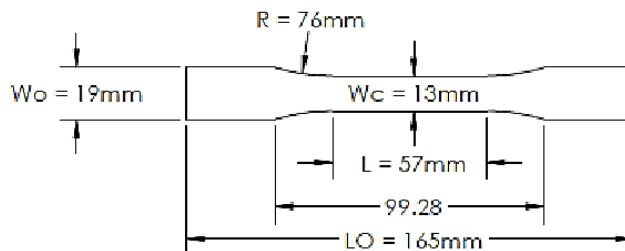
Geometry and dimensions of the specimen (ASTM D638)
